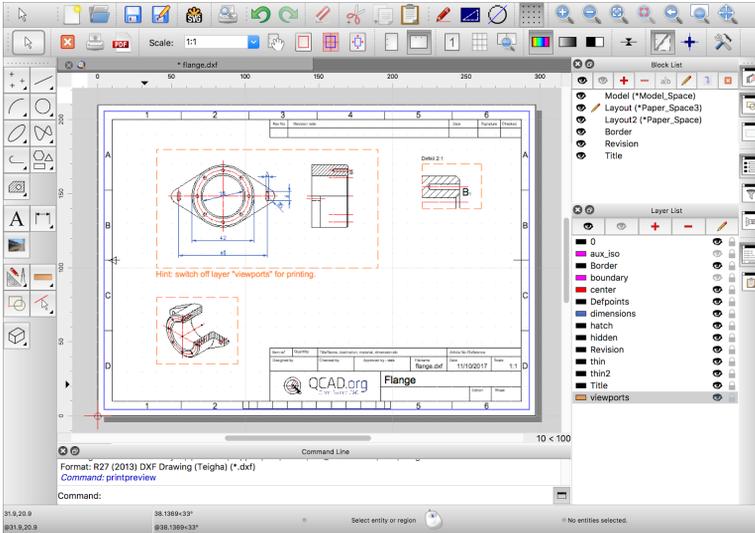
A layout block containing parts of the main drawing and a drawing border and header.
